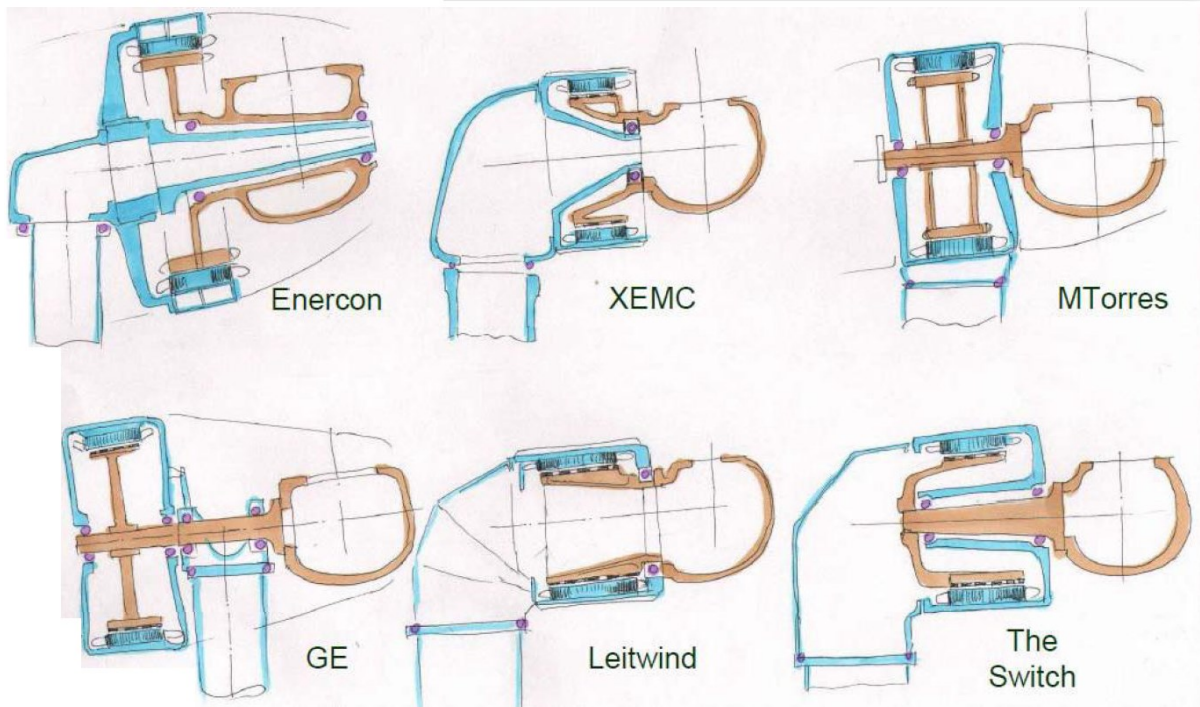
Bearing arrangements for inner-rotor direct-drive generator wind turbines [206] [207]
